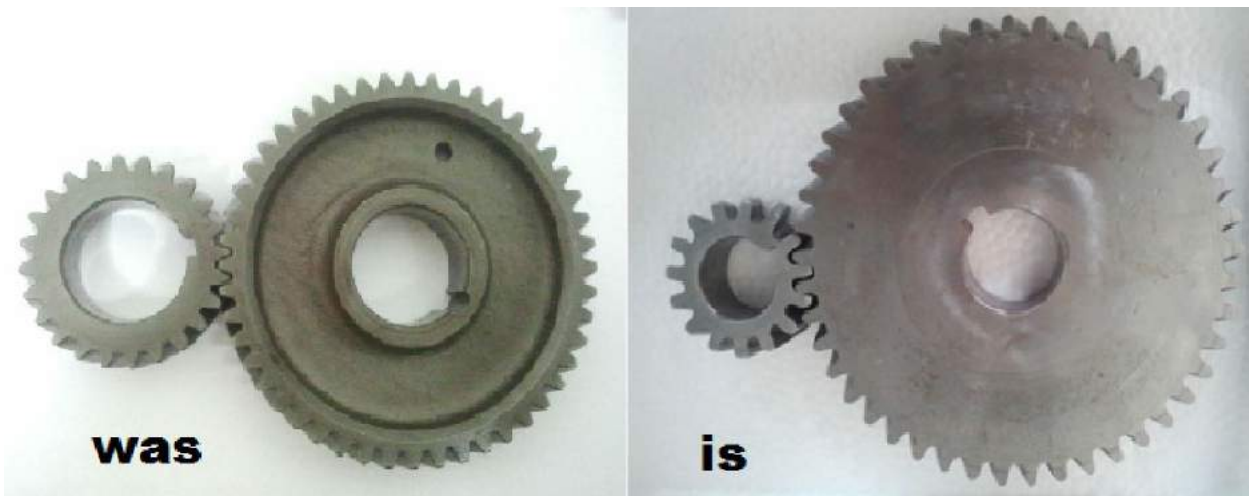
The unmodified and modified crank and cam shaft gear teeth (Shubham, 2016)
